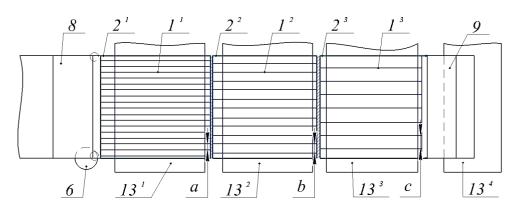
Top schematic view of the working surface of the vibrating sorting machine
